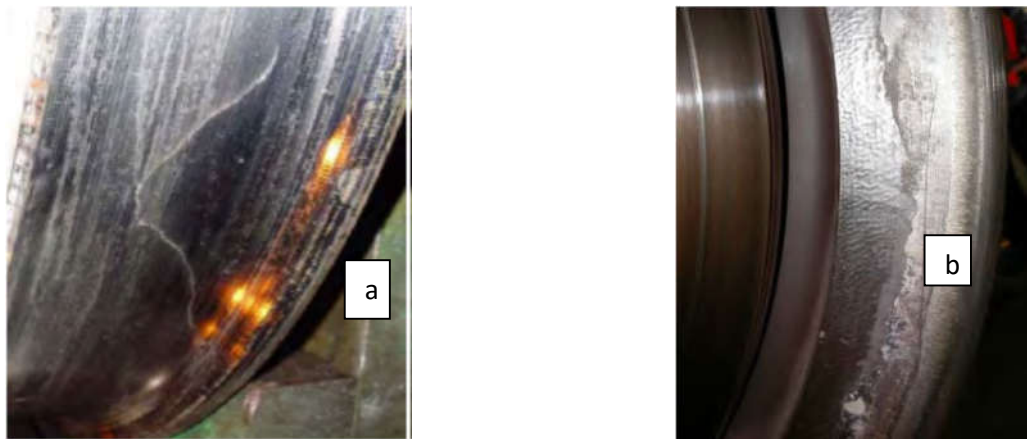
Sub-surface fatigue crack (identified during wheel turning Figure 2b) Sub-surface fatigue crack (extending to back of wheel [5])
